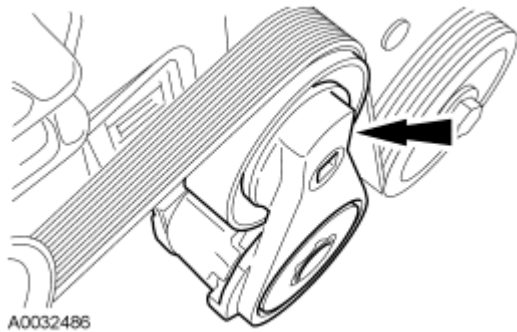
Identifying Power Steering Pump Pulley - 2.3L
